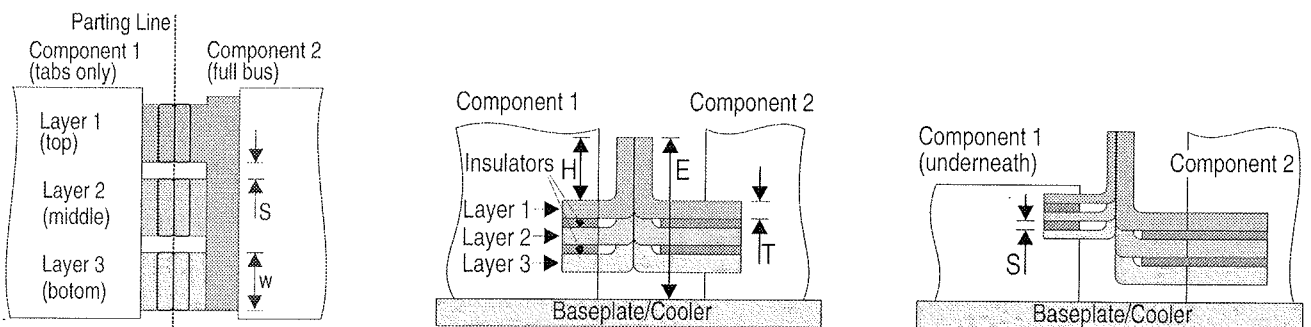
Three-tab bus edge connector for three-layer bus: (a) top view, (b) edge view with coplanar bus layers, (c) alternate edge view with non-coplanar bus layers and buses of differing thickness.
